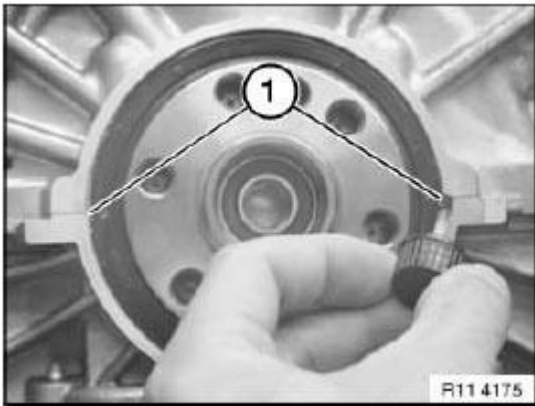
Coating Surface Of Sealing Compound In Both Grooves With Loctite Primer, Manufacturer Number 171000
